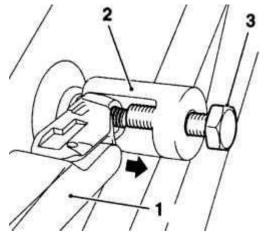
Removing wiper arm: 1 - lever, 2 - a special tool, 3 - bolt
